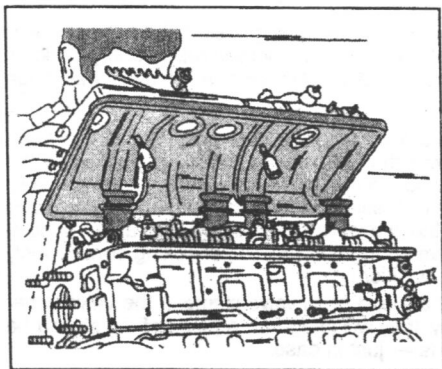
Fitting the cylinder head (rocker) cover.
